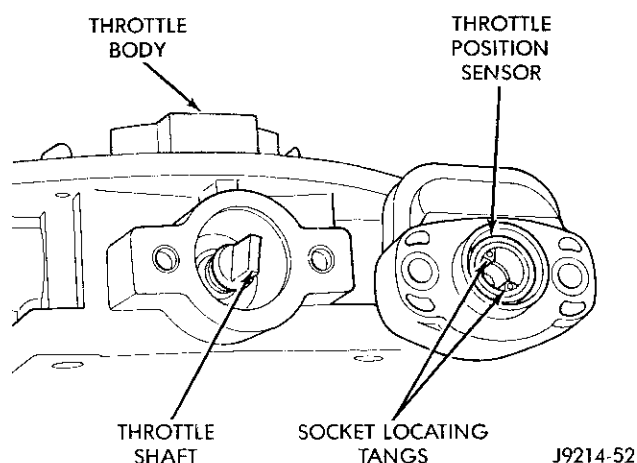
TPS Mounting Bolts—8.0L Engine
